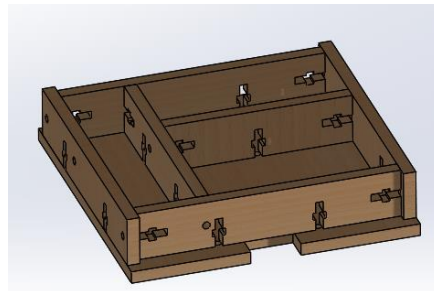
Wooden frame of the 2<sup>nd</sup> floor.
